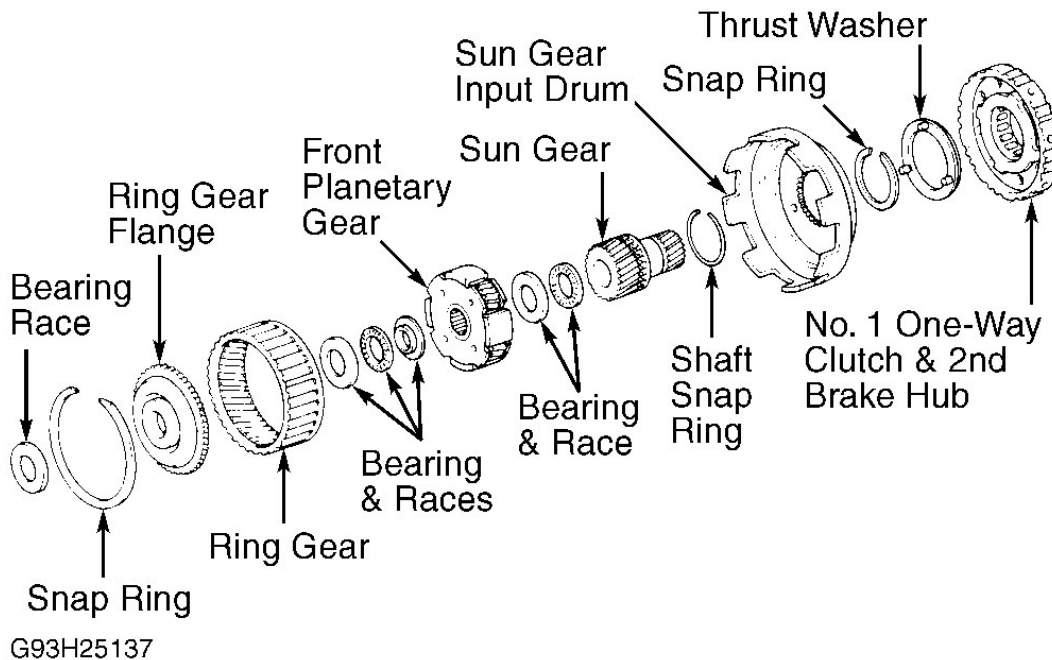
Exploded View Of No. 1 One-Way Clutch, Sun Gear & Front Planetary Gear
